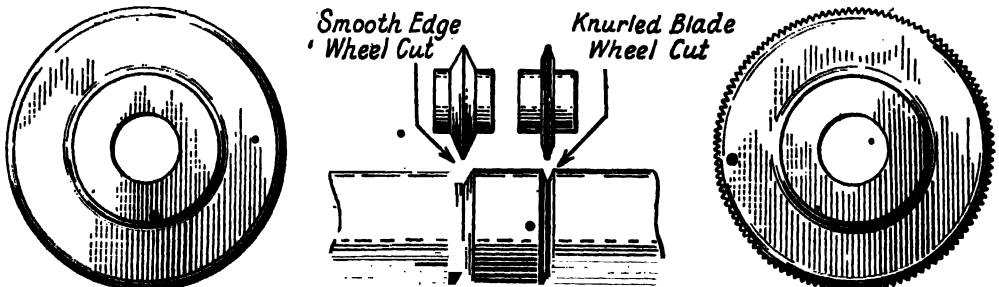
Comparison of cuts made by smooth-edge and saw-tooth pipe cutter wheels.
